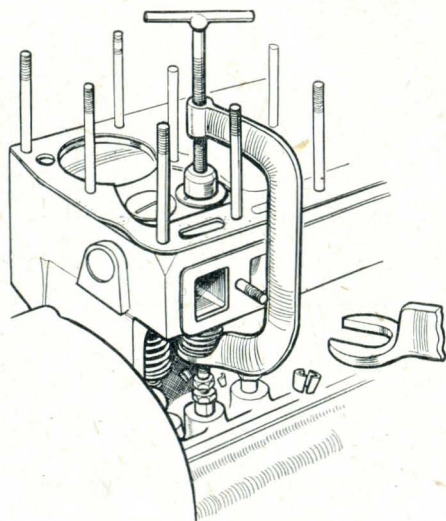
THE MORRIS VALVE COMPRESSING TOOL IN ACTION
